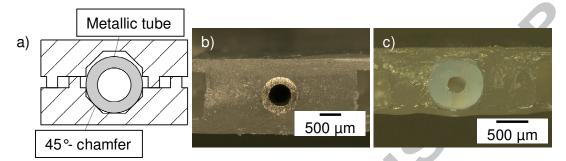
Schematic design of the intake (a), and cut through the welded intake and the employed metallic tube (b) / polymer hose (c).
